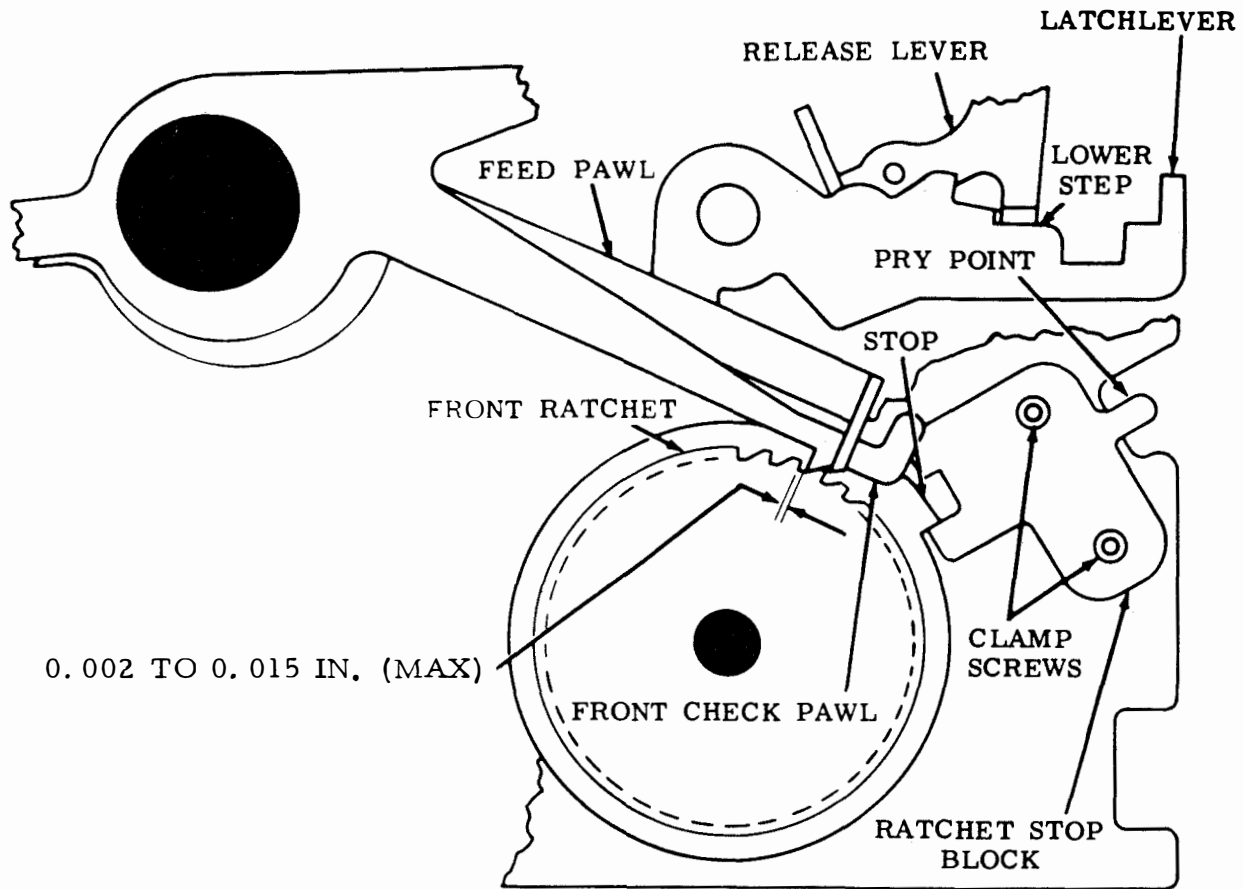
Front Ratchet STOP Position, Peperforator, Front View
